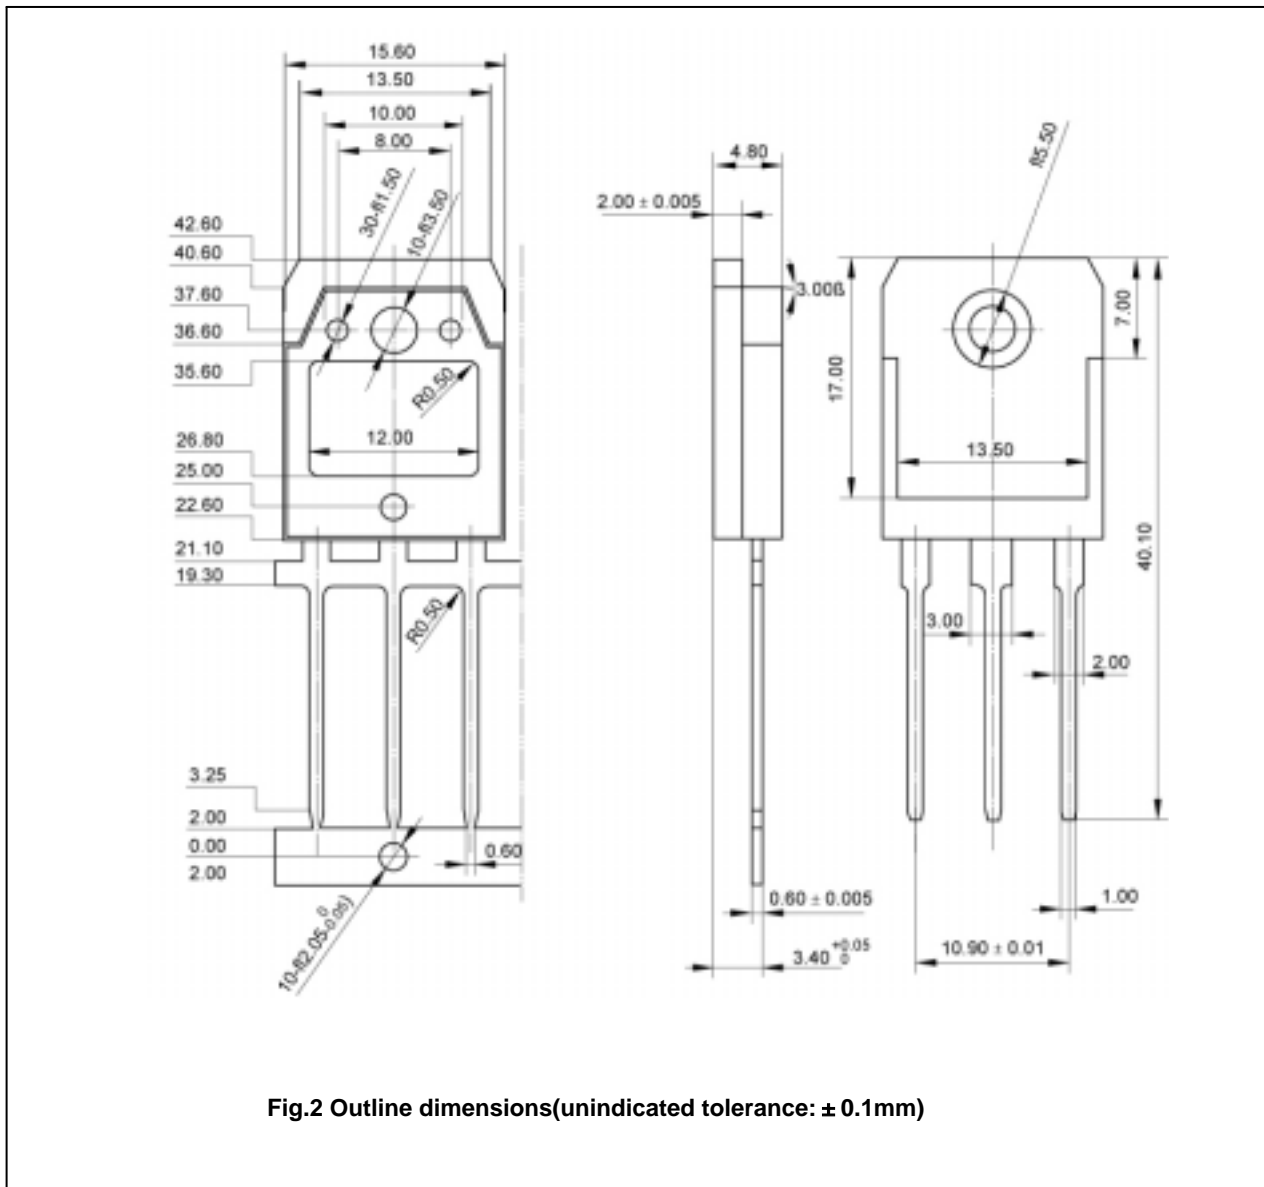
Outline dimensions(unindicated tolerance: ± 0.1mm)
